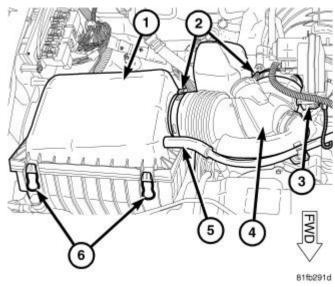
Air Filter Housing Courtesy of CHRYSLER LLC
